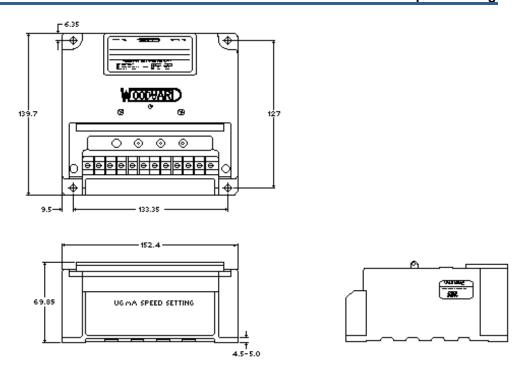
Outline Drawing of the UG MAS Final Driver Box
